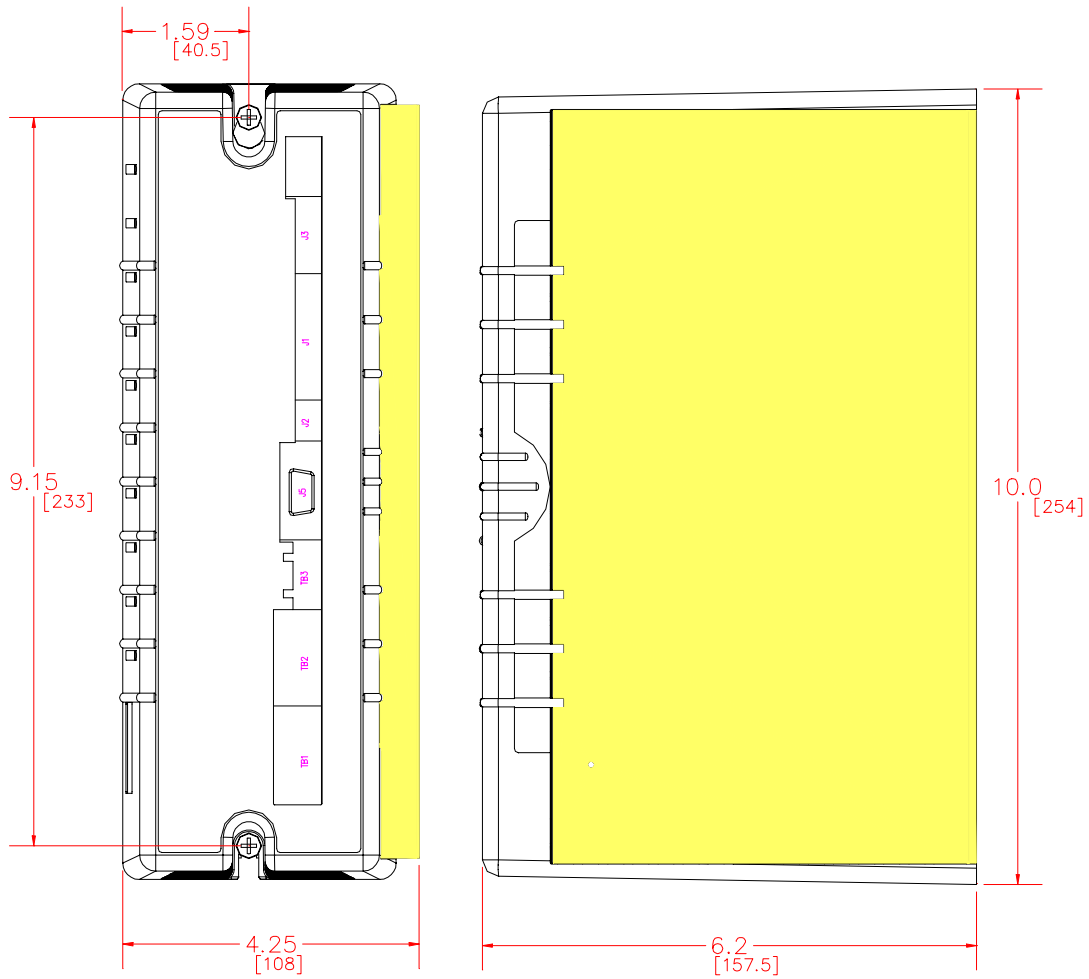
PC3403A and PC3406A Series Mounting Dimensions
